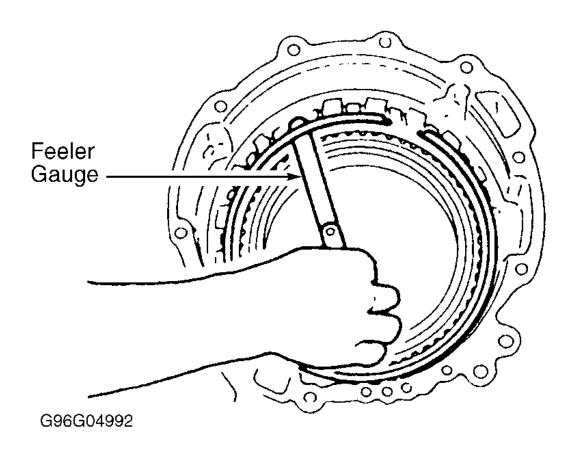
Measuring Low & Reverse Clutch Clearance Courtesy of MAZDA MOTORS CORP.
